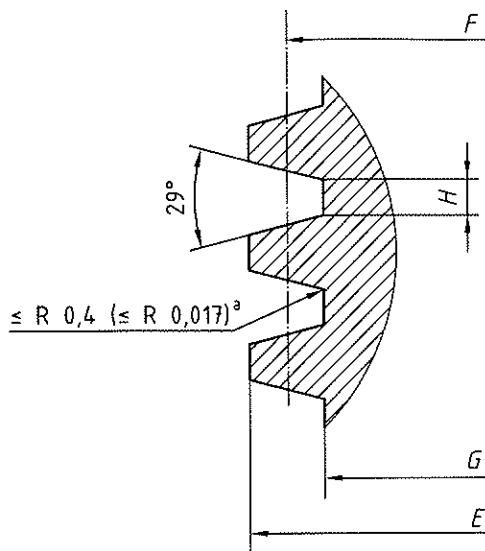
Valve-removal plug dimensions for 15 000 psi through 20 000 psi rated working pressure
